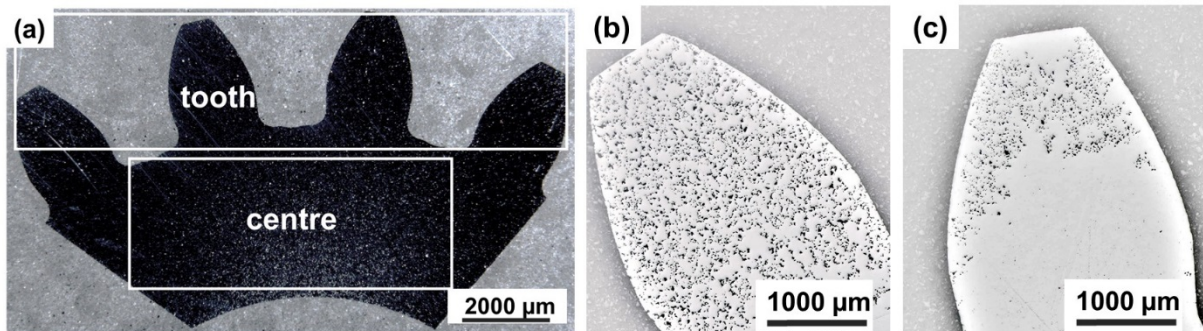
Micrographs of the gear cross section showing the analysed tooth and the centre region for the gear samples (a), tooth region of the samples after HIP sectioned at the neutral zone, Gear B (b) and Gear C (c) [Paper VII].
